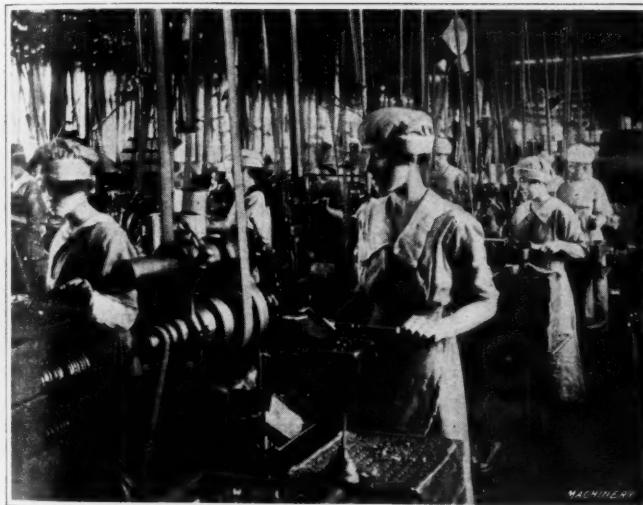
Women operating Hand Milling Machines for Manufacturing Work
